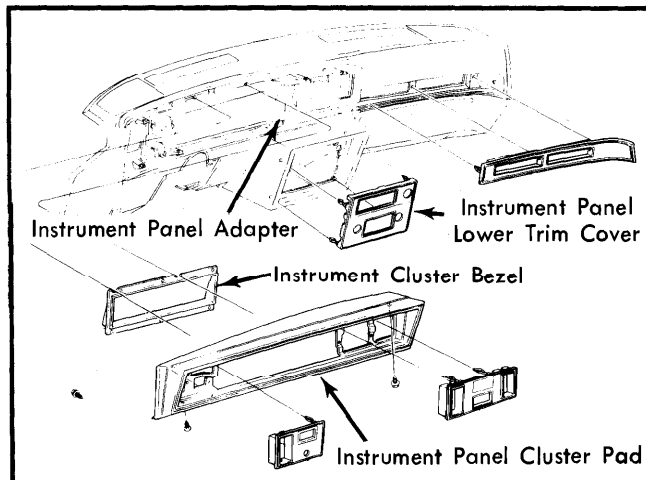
Left Trim Panel Removal (88 and 98 Models)
